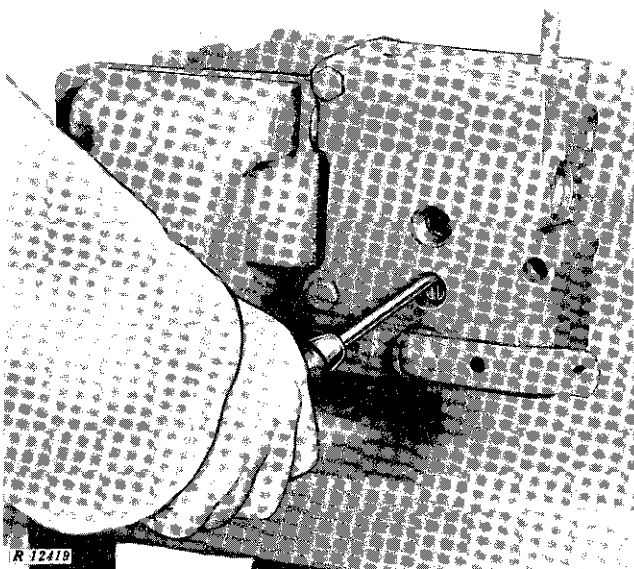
Moving Operating Cam Toward Adjusting Screws
